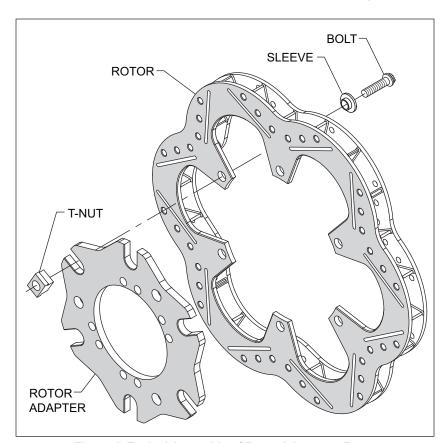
Typical Assembly of Rotor Adapter to Rotor
